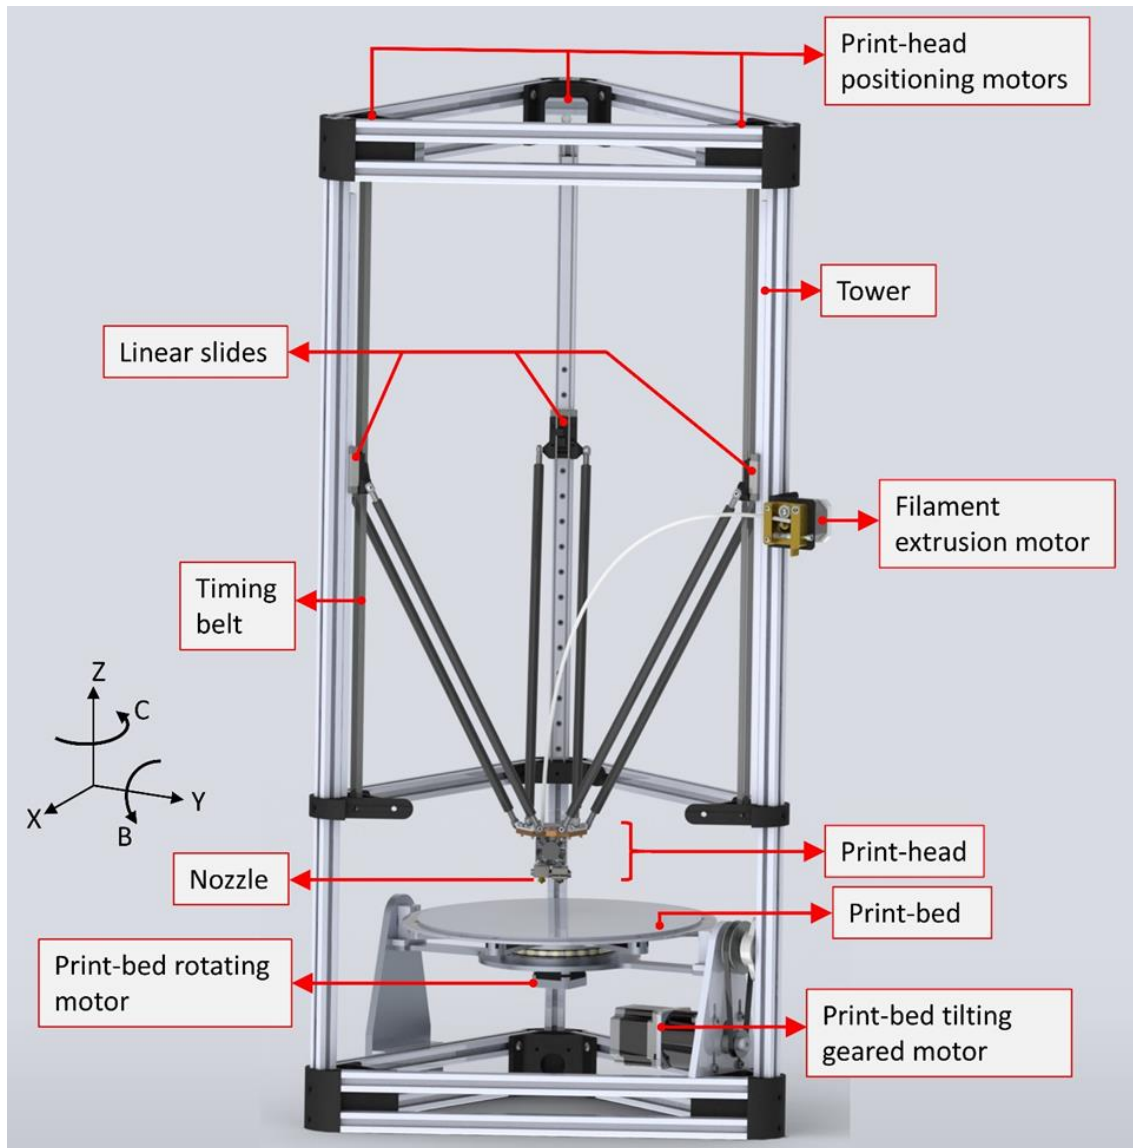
5-axis 3D printer design showing actuators and mechanical components of the system
